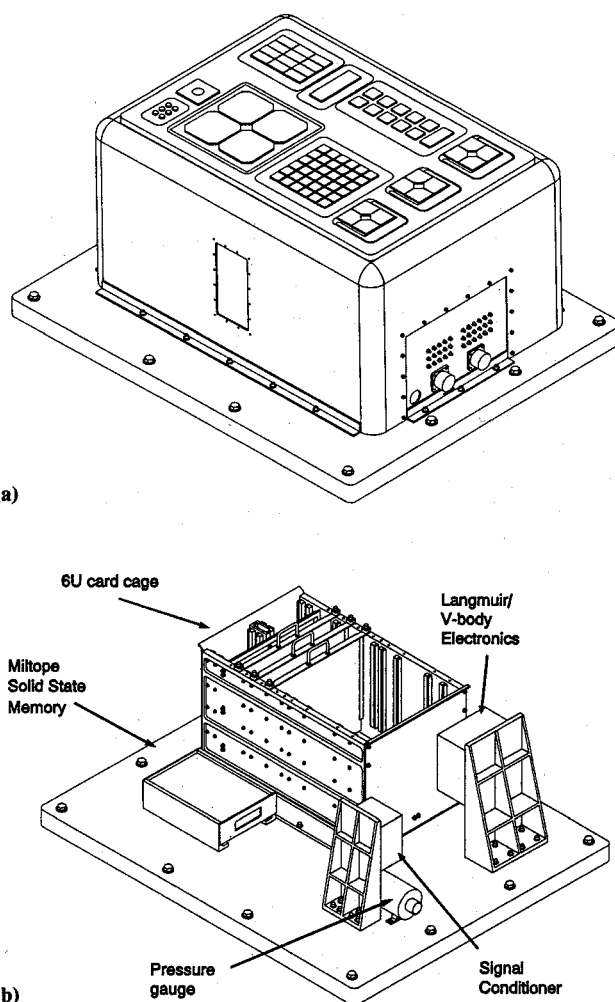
An external view of the SAMPIE package: a) with enclosure and experiment plate installed; and b) with enclosure cover removed.
